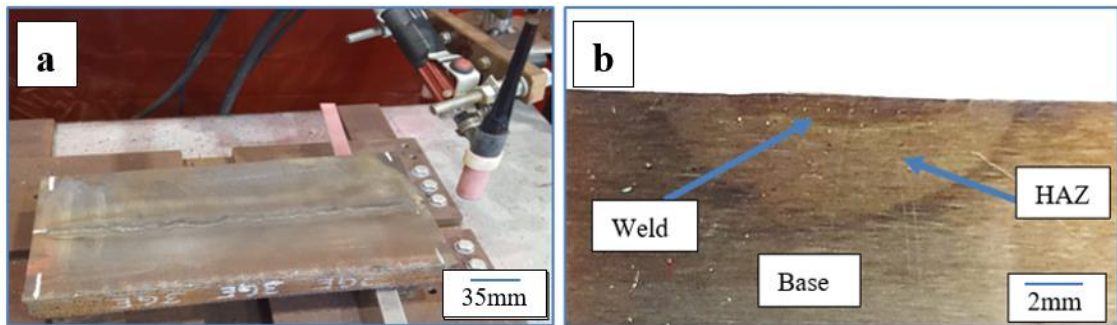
(a) BOP test coupon and (b) cross-section of the BOP weld.
